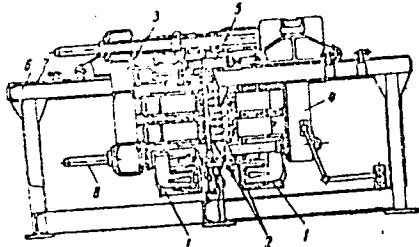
1 - welding transformers; 2 - welding guns; 3 and 4 - vertical plates; 5 - driving mechanism for plates; 6 - frame; 7 - guides; 8 - rods
